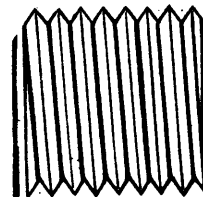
REPRESENTATION OF A COARSE V THREAD.
